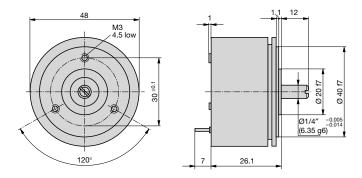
KINAX 3W2 with shaft dia. 1/4", length 12 mm.
